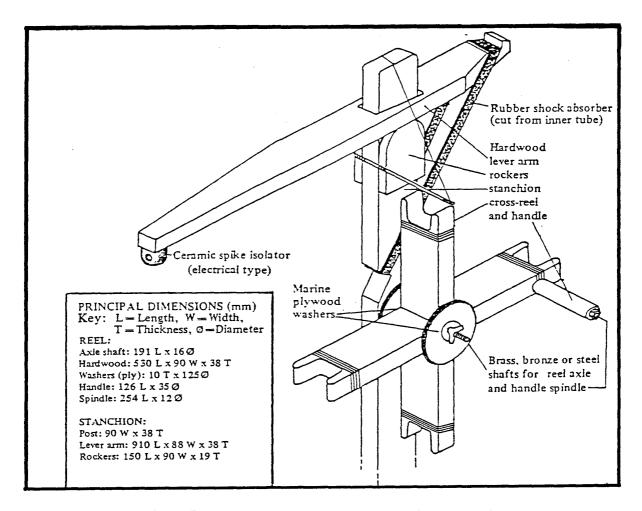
Wooden handreel used by the Project at Wallis and Futuna showing design modifications
